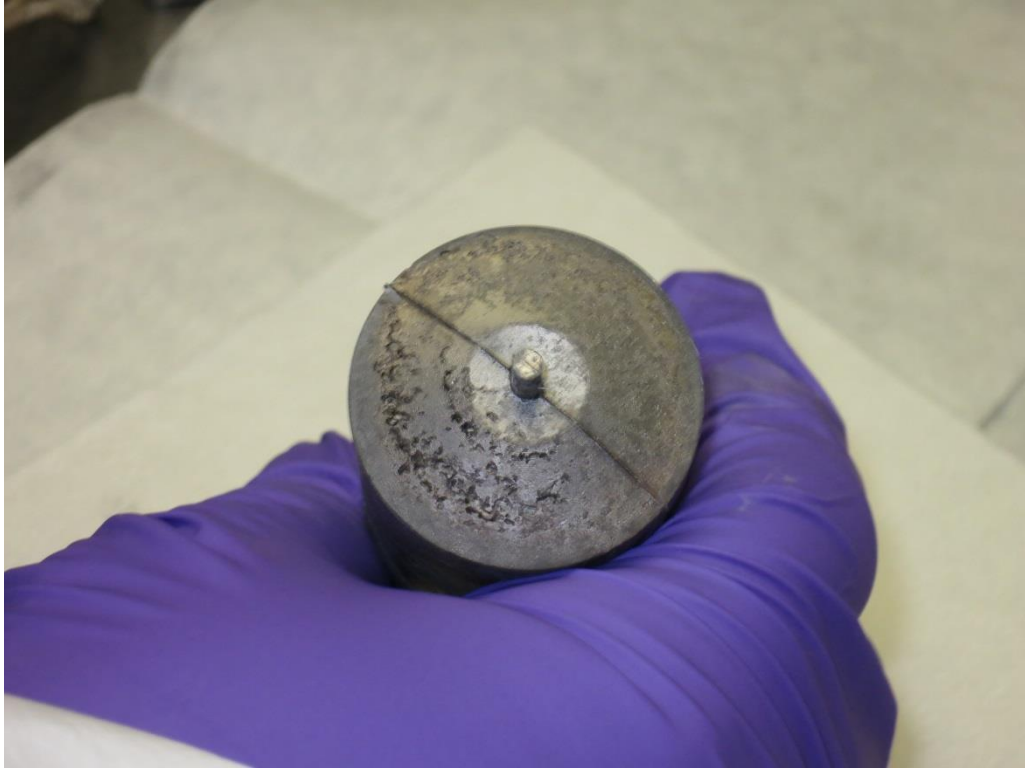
Bottom of billet cast on 4/24/17 showing surface voids from the bottom of the casting.
